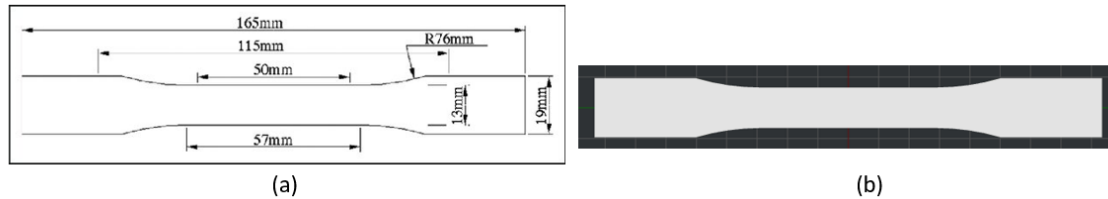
(a) ASTM D638-14 tensile Specimen Dimension, and (b) SolidWorks design for preparing the G-code.
